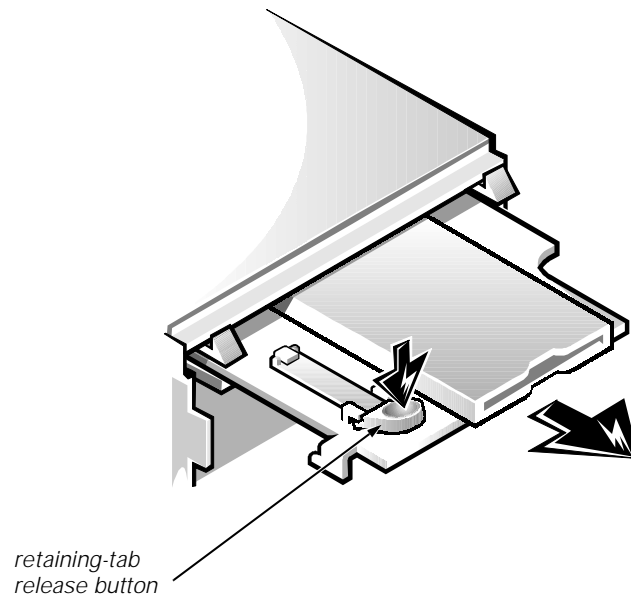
3.5-Inch Diskette Drive Assembly Removal
